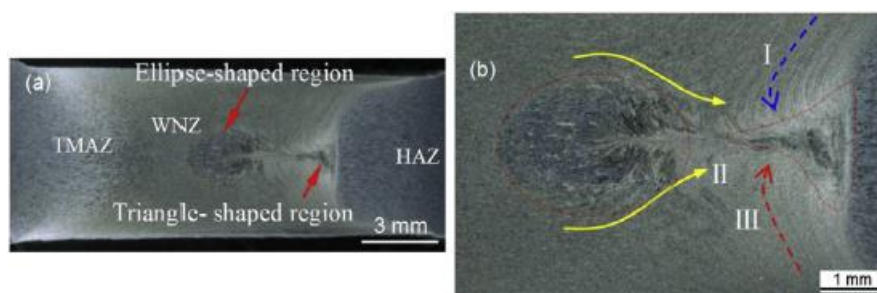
“Macrostructural image of the weld produced using the Bobbin Tool FSW process”. [20]
